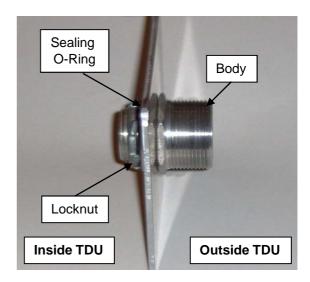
Body Installed in TDU Knockout Hole O-Ring Installed and Locknut Tighten
